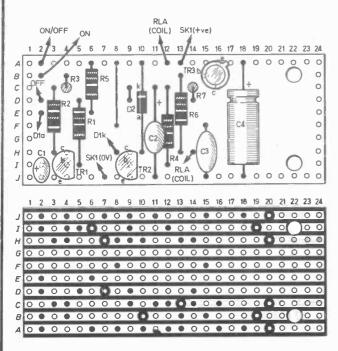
Layout of the components on the topside of the board, showing wiring connections, and breaks necessary on the underside of the board
